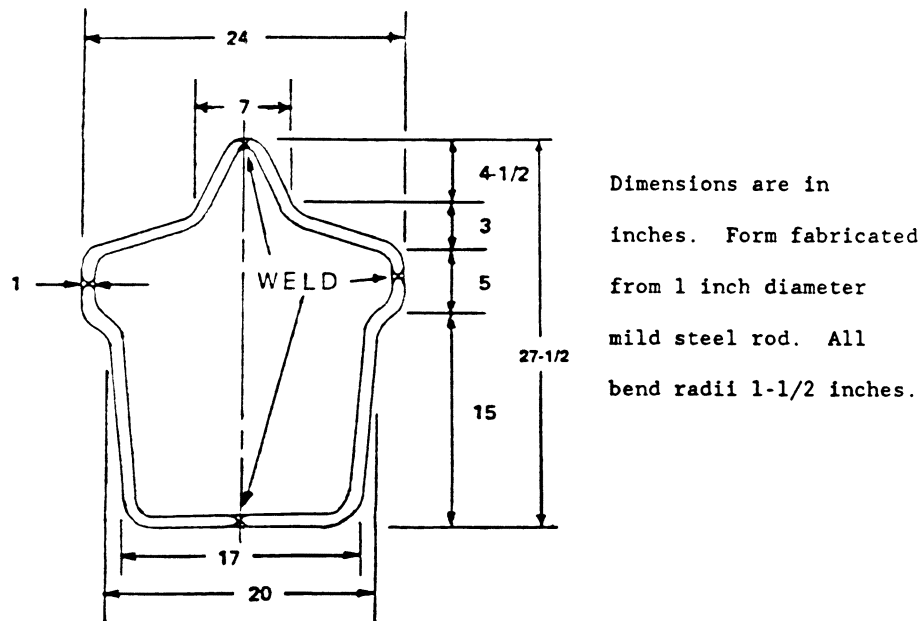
(n)(1) Body Tensile Test Arrangement
